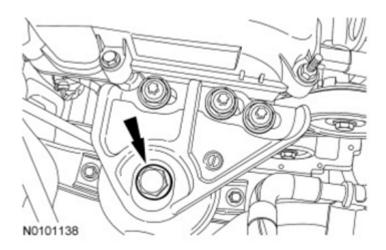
Locating Engine Mount Bracket Bolt Courtesy of FORD MOTOR CO.
